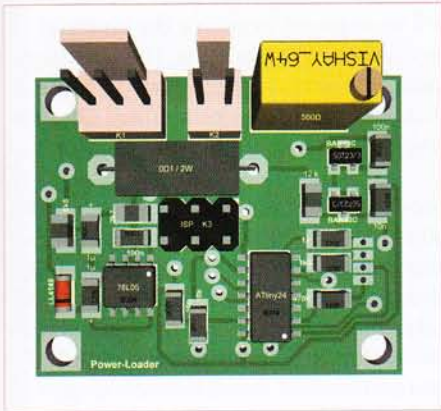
3D simulation of the mini PCB topside rendered using Target 3001. The double-sided board is not through-hole plated.
